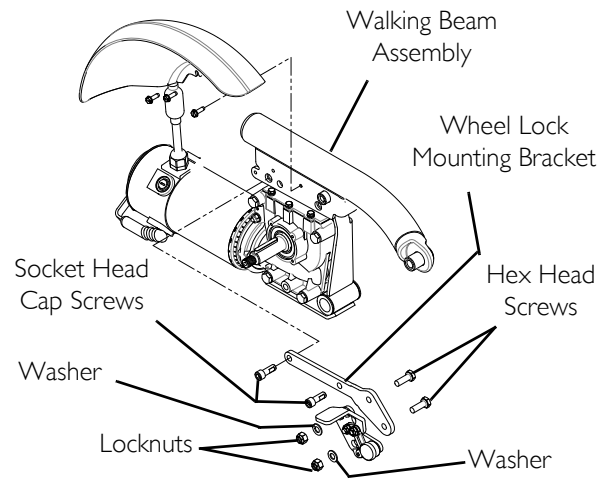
Installing the Wheel Locks - SSD 4-pole Motor
